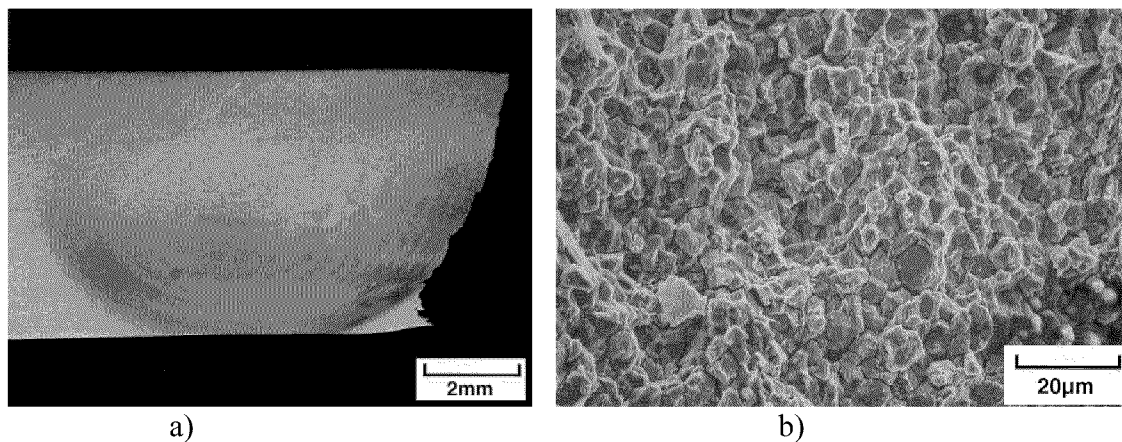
SCC fracture in FSW AA7050-T751 a) Optical macrograph showing cross sectional view and b) SEM photomicrograph of the fracture face.
